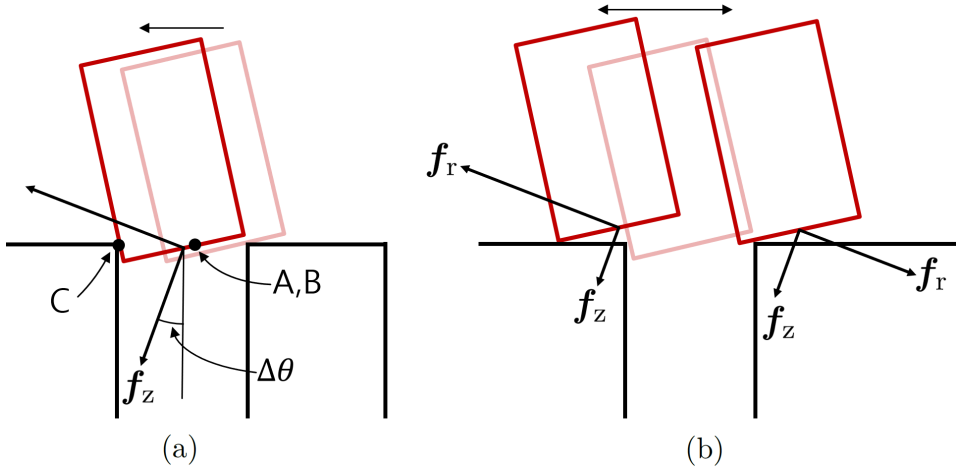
Movement of the peg due to the assembly force and spiral force: (a) finding the hole; (b) missing the hole.
